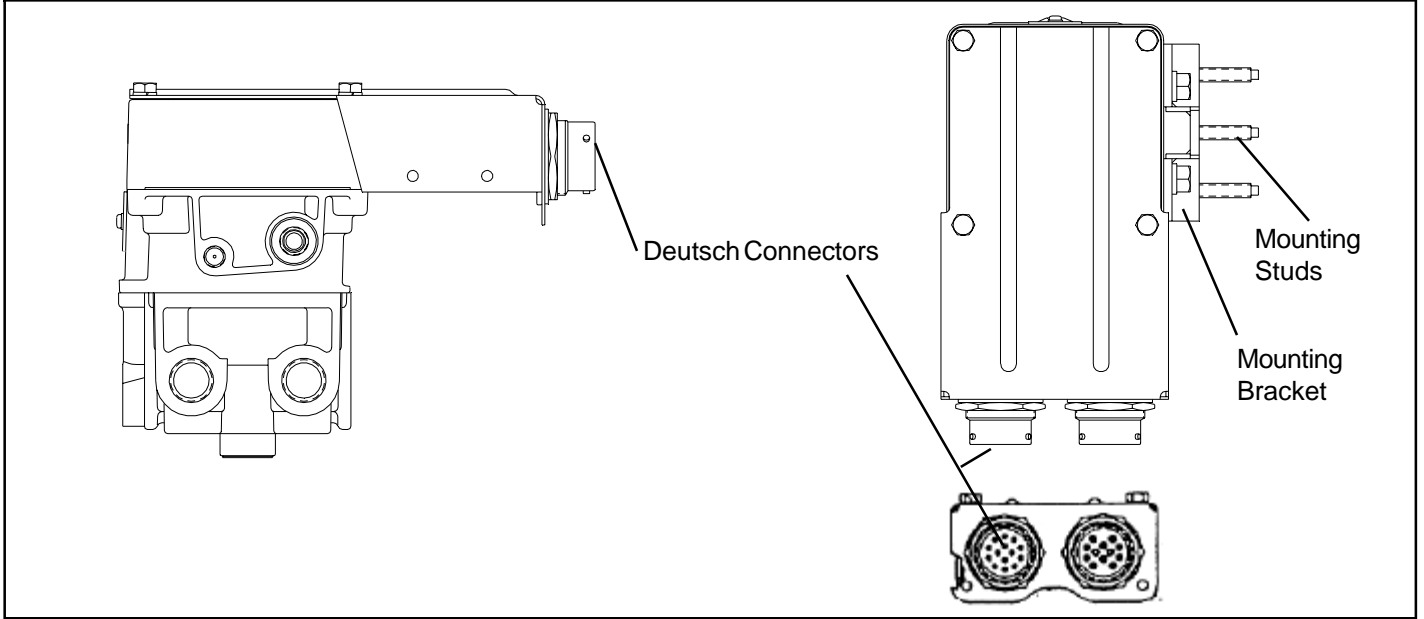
CR-16 Controller Relay Assembly (2-14 Pin Deutsch Connectors)
